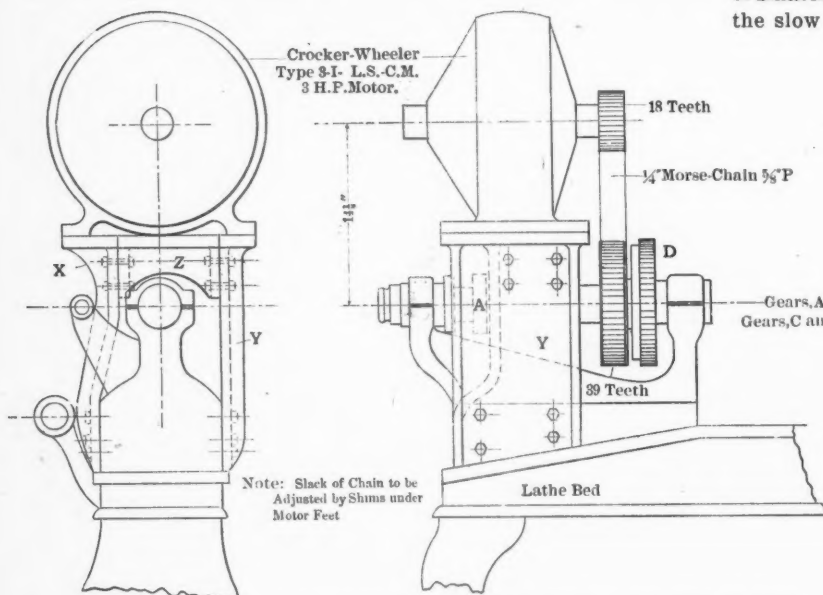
DETAILS OF THE ARRANGEMENT OF MOTOR DRIVING FOR THE 18-INCH TURRET LATHE FOR BRASS WORK.
